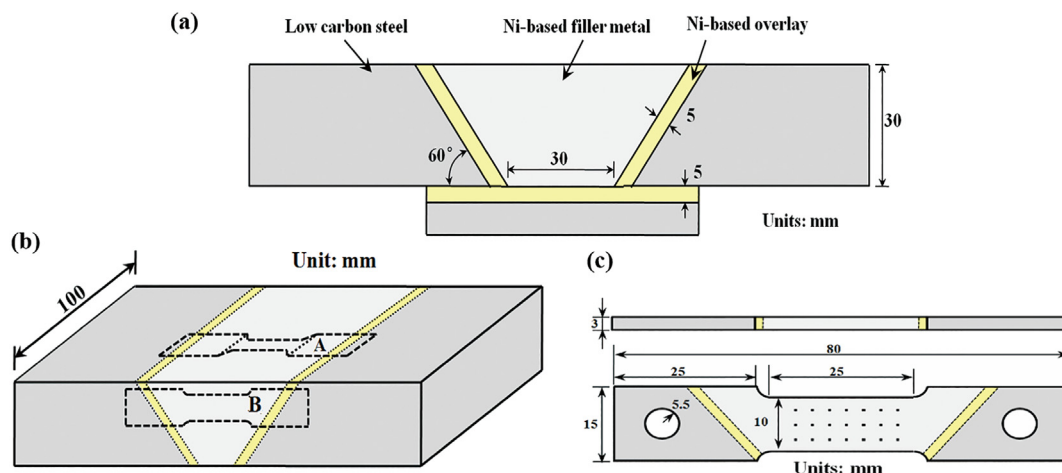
Schematic illustrations of material preparation (a) weldment (b) specimen preparation (c) dimensions of the specimen.
